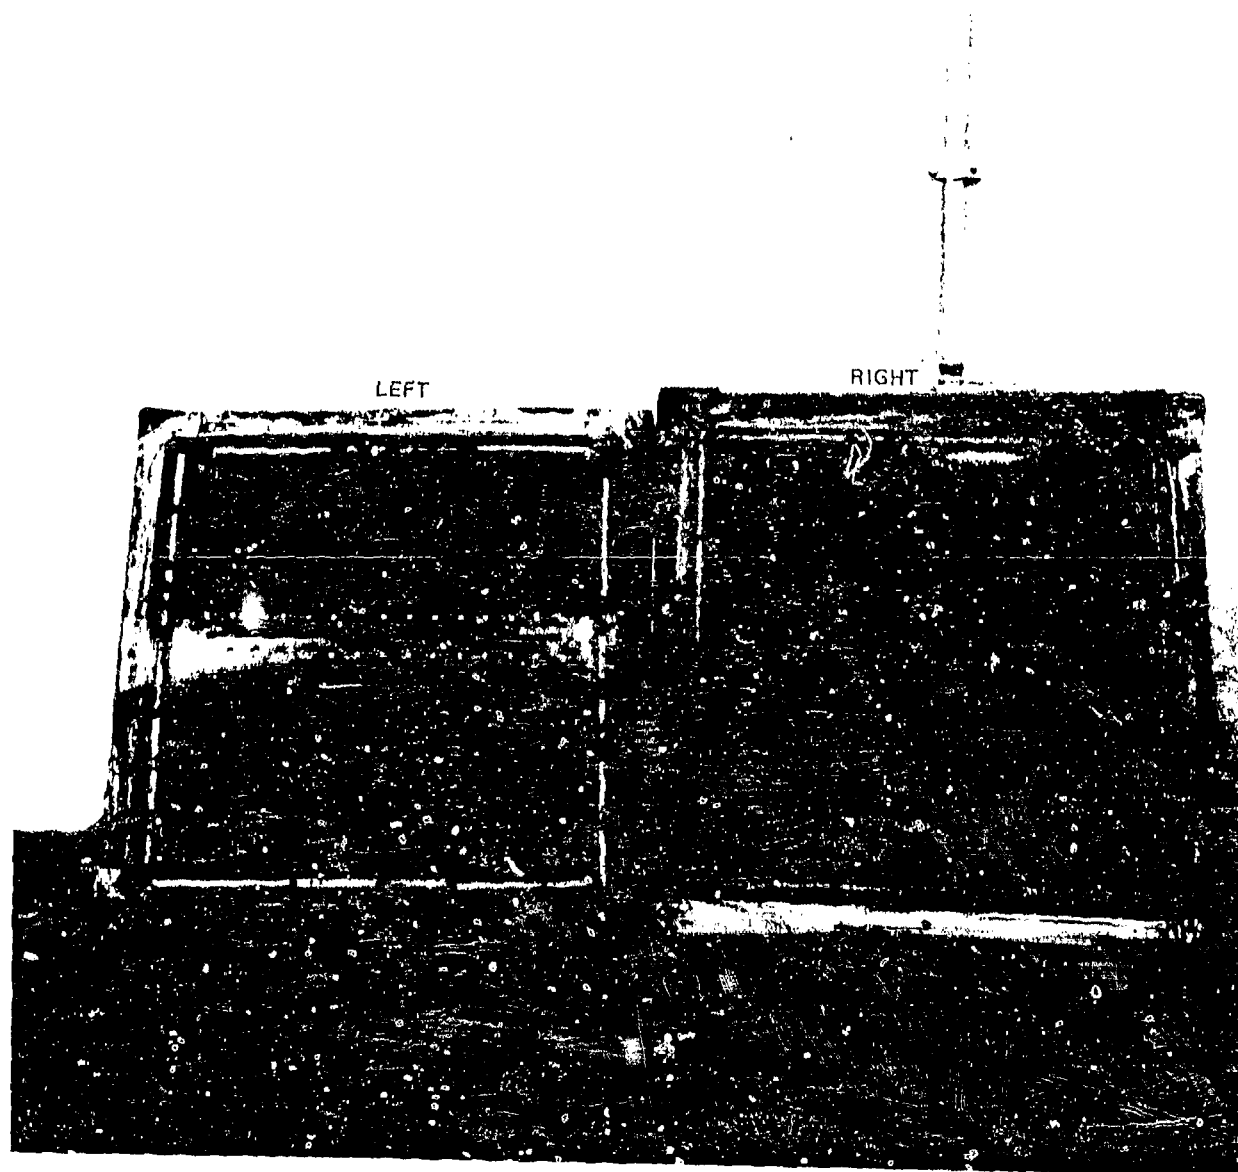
Left one side of a completed joint; right -- unjointed graphite-epoxy panel
